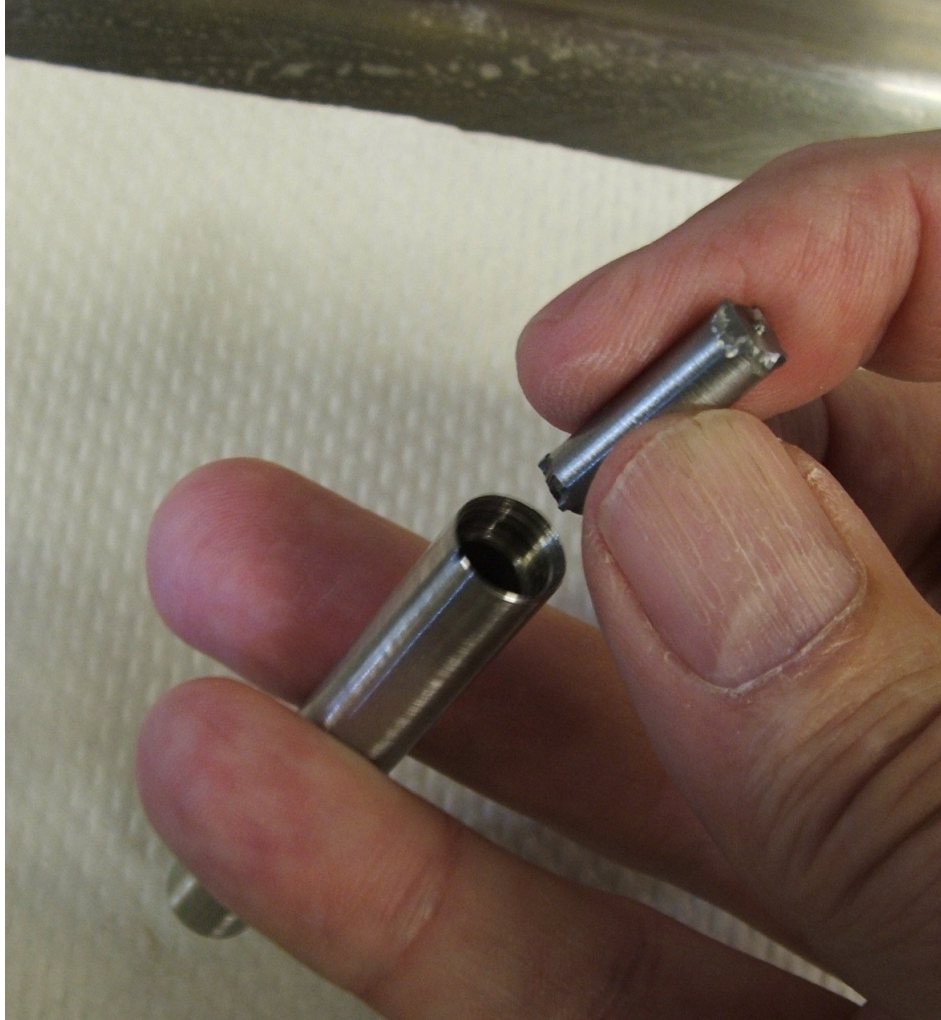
Insert the sinker with “T” entering first or bumper point (as shown) entering last.
